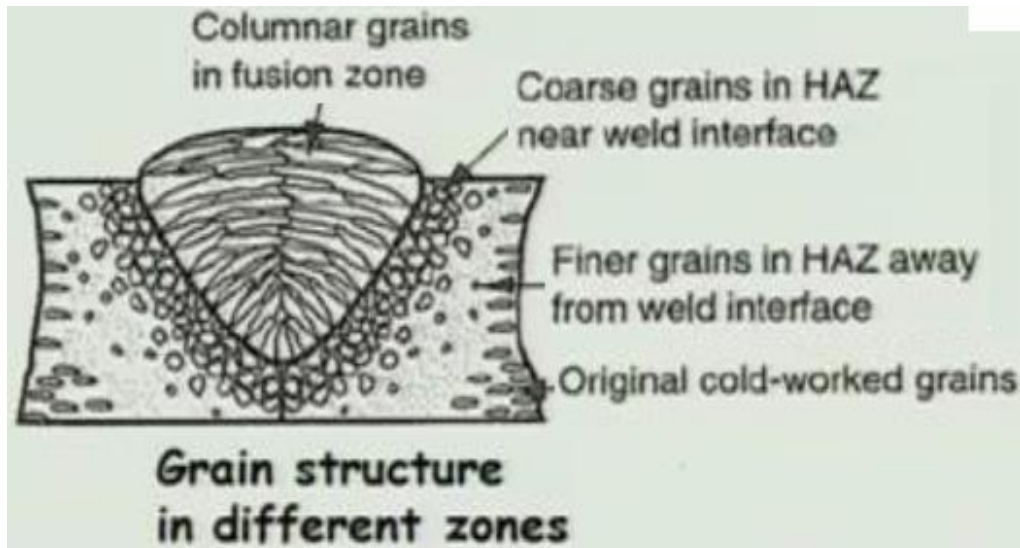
Weld pool and grain Boundaries (GB) in weld pool.
